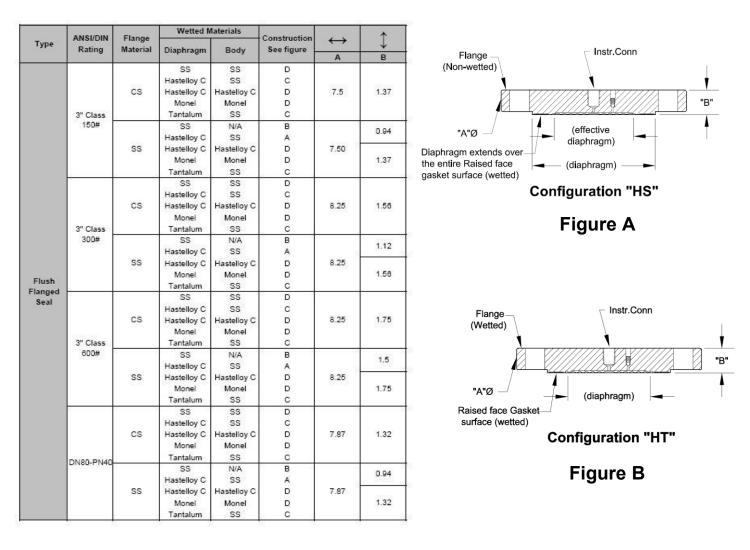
Approximate vertical mounting dimensions for Remote Seal Transmitter
